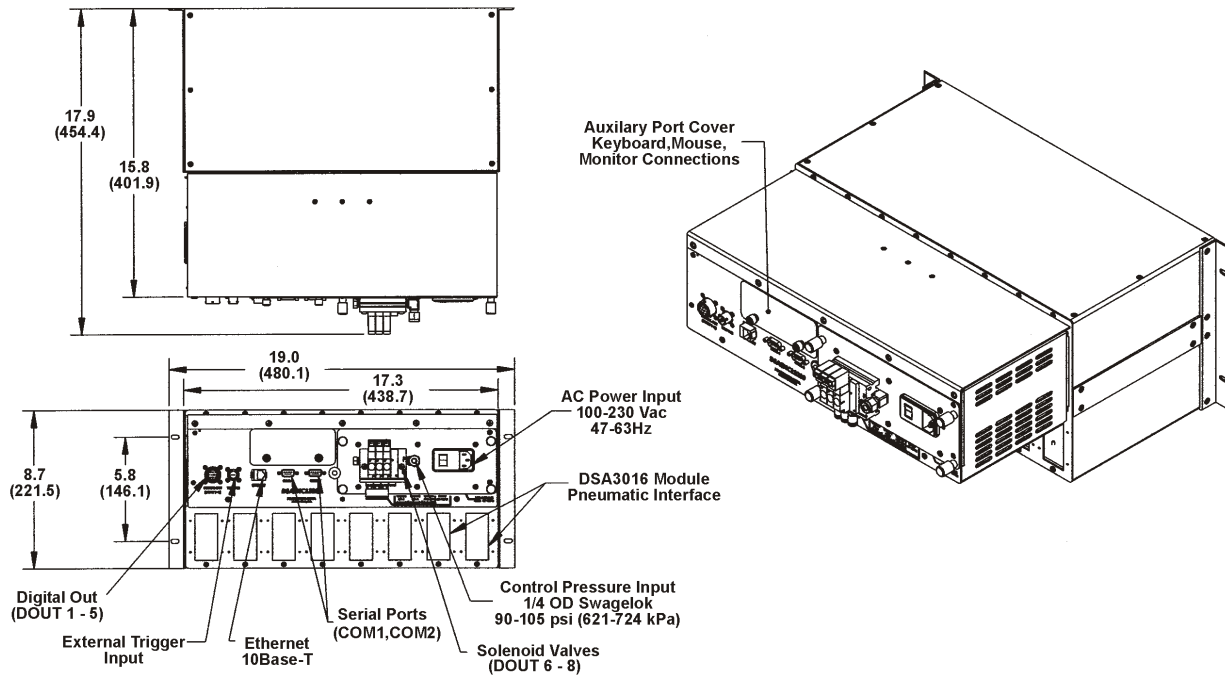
SPCENCL3200 Physical Measurements and Mounting Dimensions
